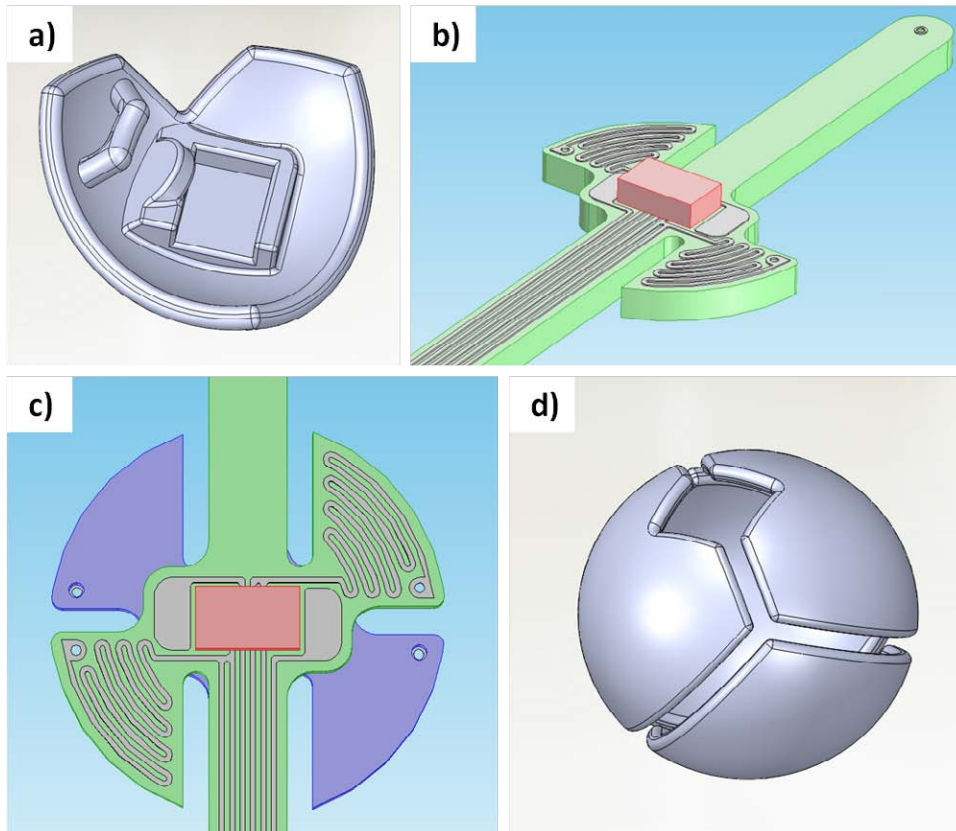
Models of the spherical wind sensor components, a) triangular sector with its interior heat resistor mold, b) PCB with electrical layout and central core resistor, c) union of the two PCB's where mechanical support and electrical wiring are provided for each sector, d) four triangular sectors assembly.
